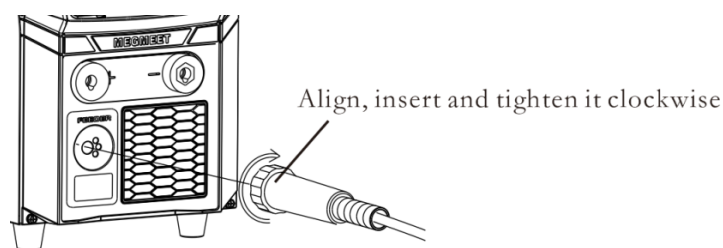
2 Welding Torch Connection Schematic Diagram
